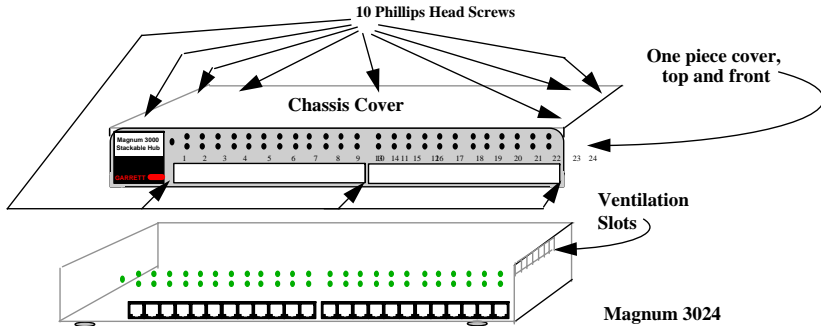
Removing Magnum 3024 / 3012 Chassis Cover
